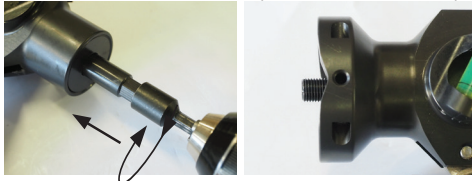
Use your drill to fully extend the cutter end (above right) BEFORE cutter installation.
